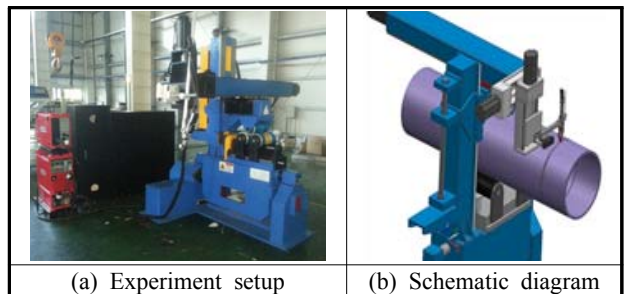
Constitution of 4-axes control automatic welding system
